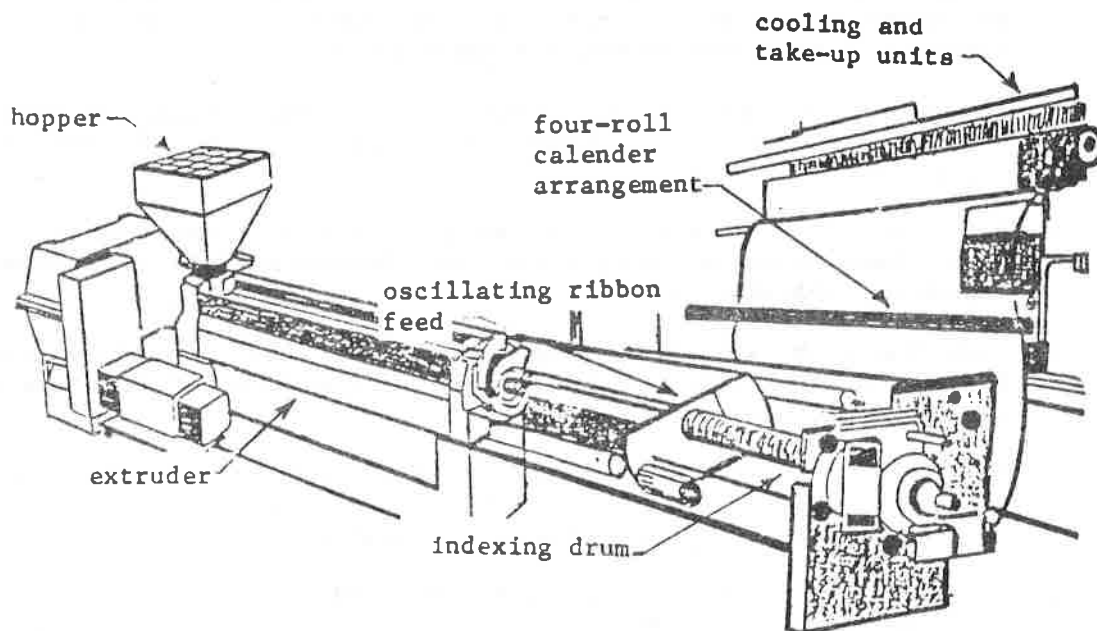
Extruder, Ribbon Spreader, and Take-up Roll
